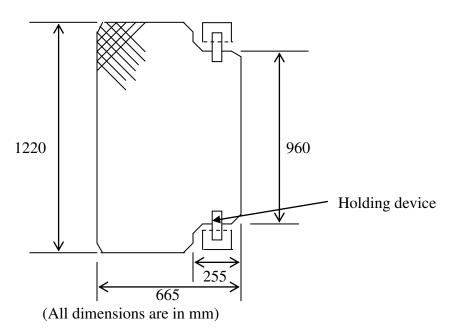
Sketch of foot plate (item 9) to drawing no. RDSO sketch - 88059 alt. 5 and RDSO sketch - 99057 showing the overall dimensions. This foot plate is manufactured and fitted in the shop during POH to replace the damaged foot plates.
